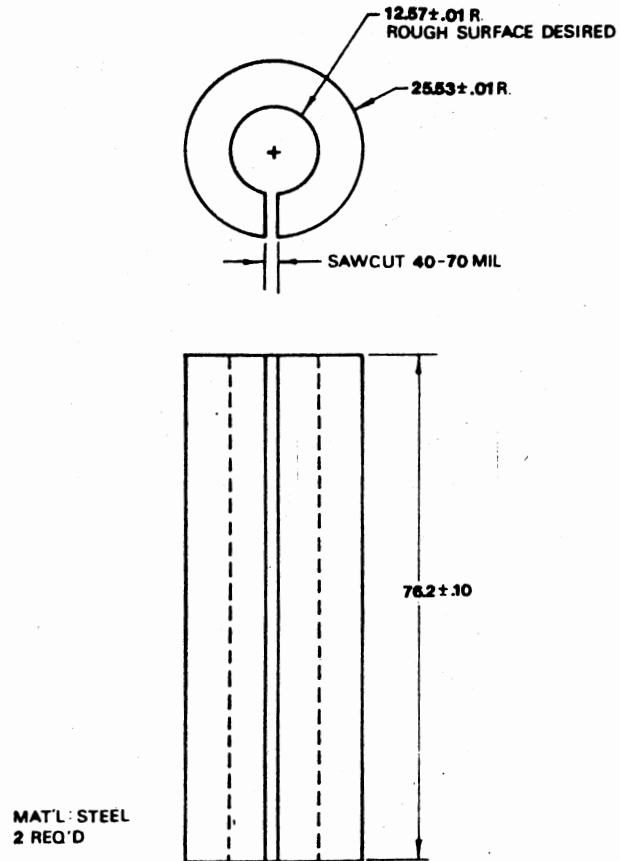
Details of the Holding Grip for the Cyclic Test Specimens (All Dimensions in mm)
